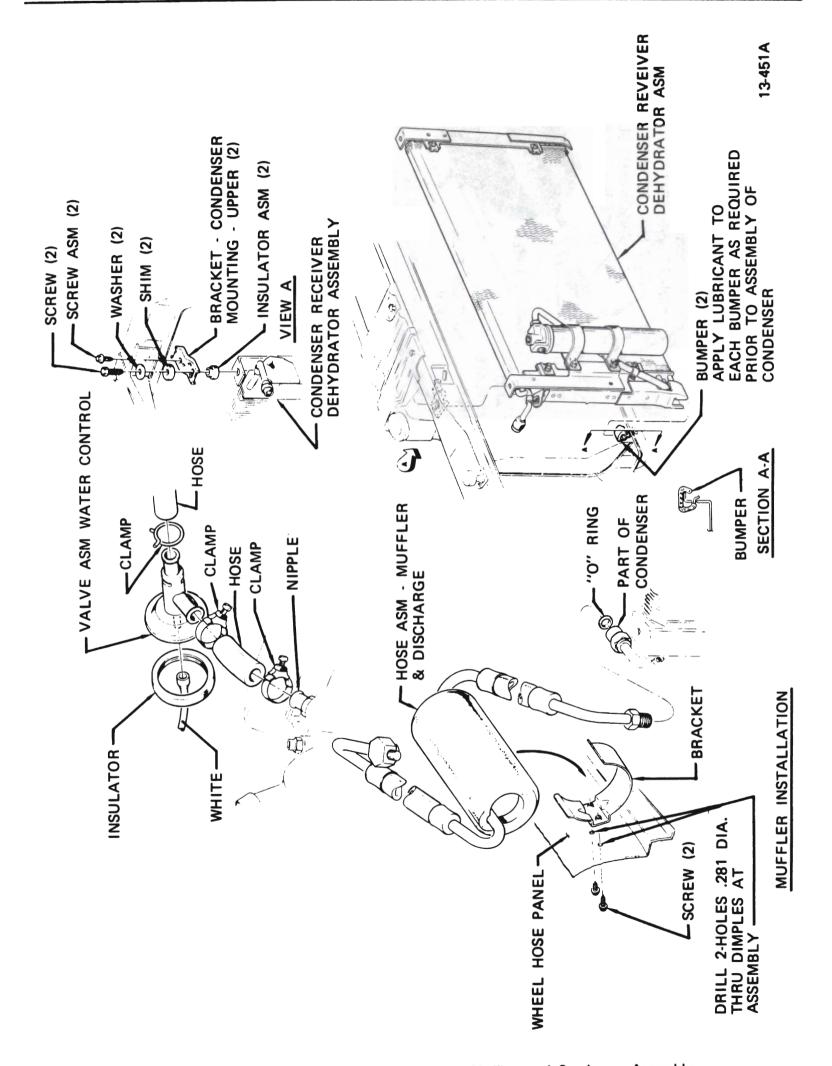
4D-4F-4G-4H Series Water Valve, Muffler, and Condenser Assembly
